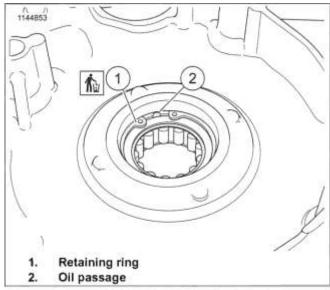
Retaining Ring Orientation MAINSHAFT BEARING INNER RACE
